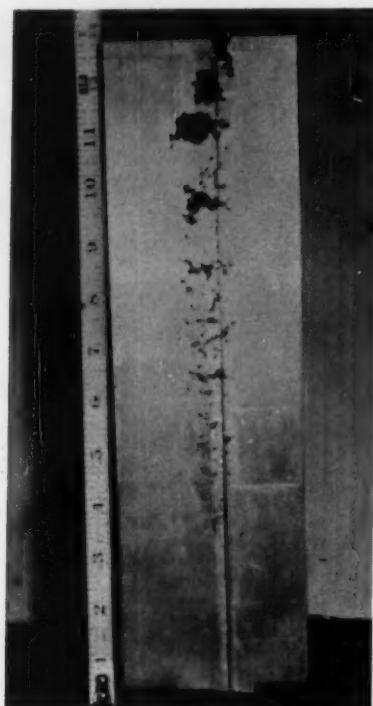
3 5/8-in. diameter uranium, 8 per cent molybdenum alloy. This casting was originally 18 in. long. Centerline shrinkage extended almost throughout the casting.
